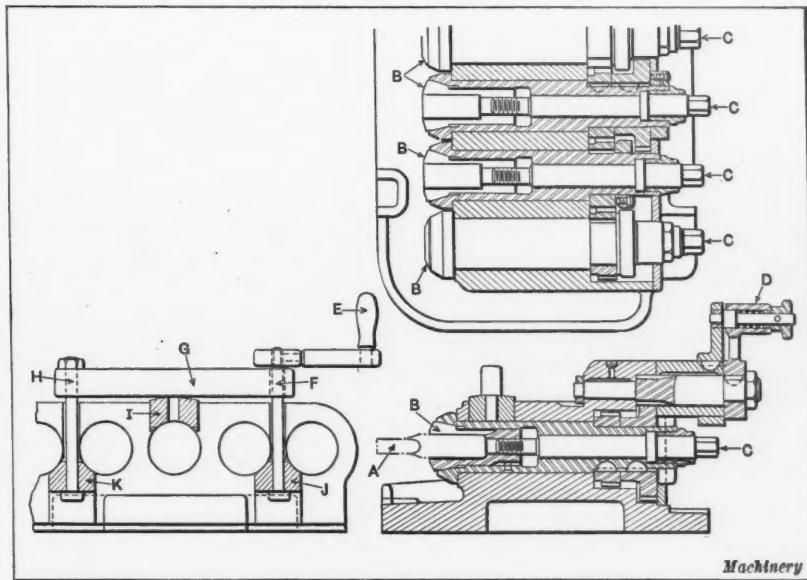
Sectional Views of Indexing Work-holding Fixture shown on the Machine in Figs. 7 and 8
